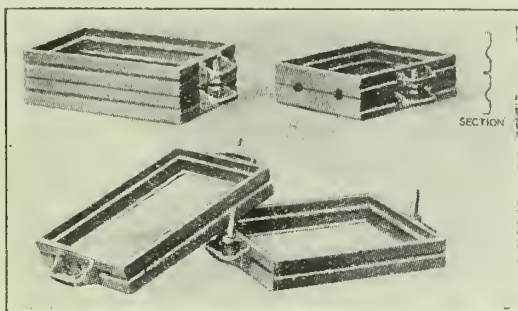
PRESSED STEEL MOULDING BOXES (MESSRS. ADAPTABLE MOULDING MACHINE CO.)
